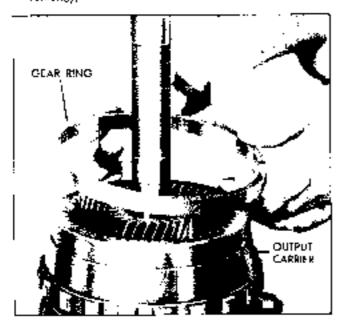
Installing Foort Internal Gear Ring to Output Carrier
